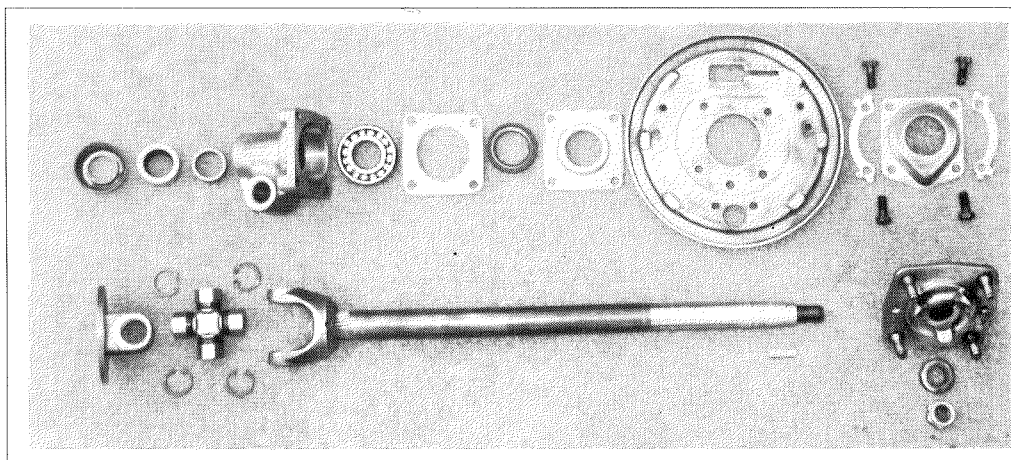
Shown here are all the components ready for reassembly onto the halfshaft. Cleaning all the components prevents you getting dirt into the new bearings during reassembly.
